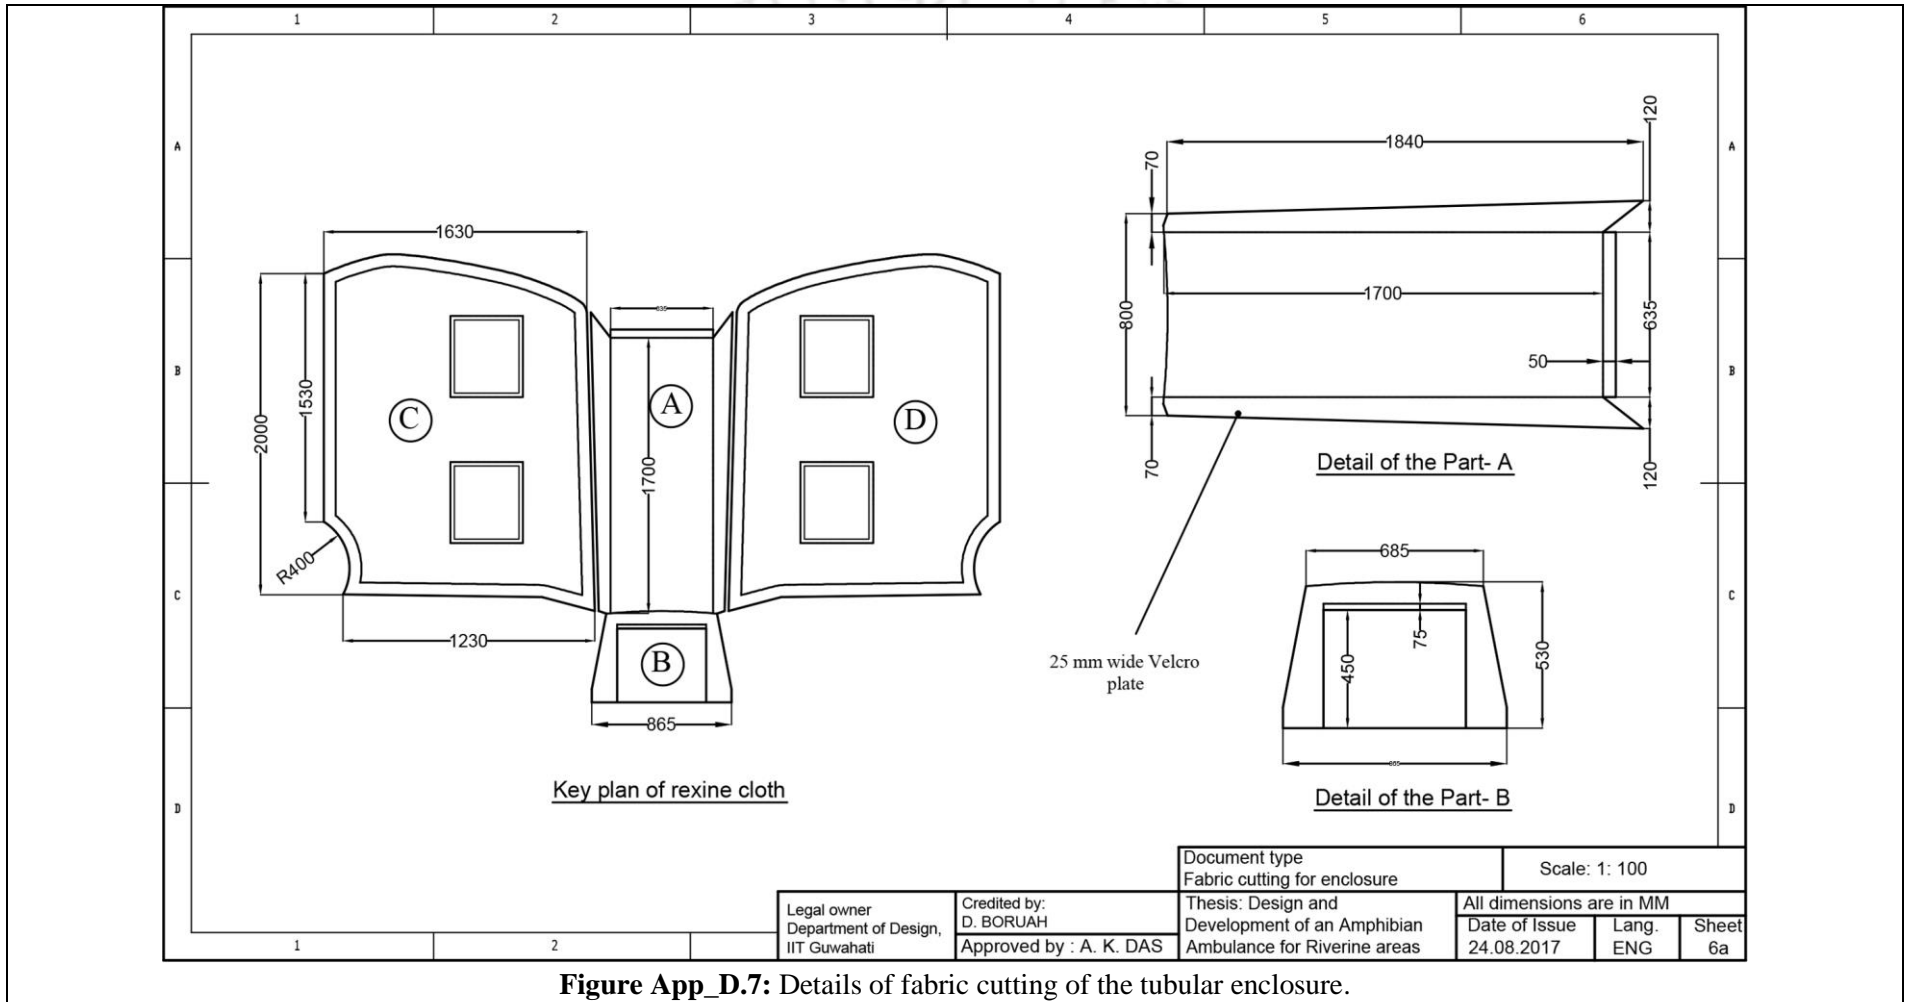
Details of fabric cutting of the tubular enclosure.
